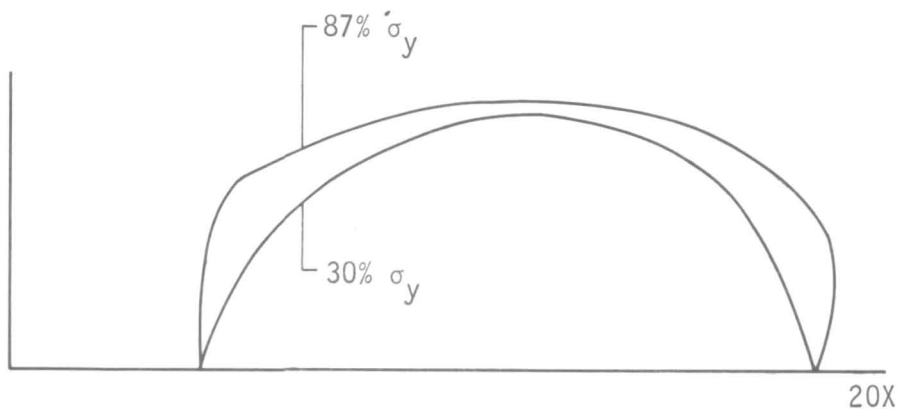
Fractograph and flaw map of specimen TOL-9.
